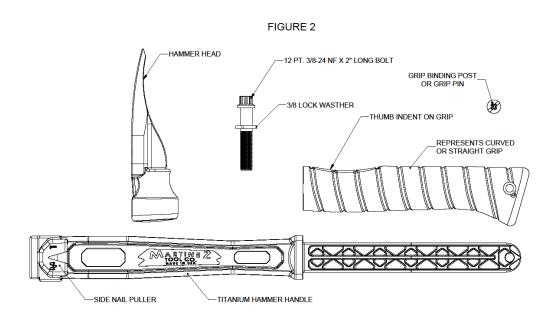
below illustrates all the individual parts used for a complete Martinez Tools Titanium handle hammer assembly.
